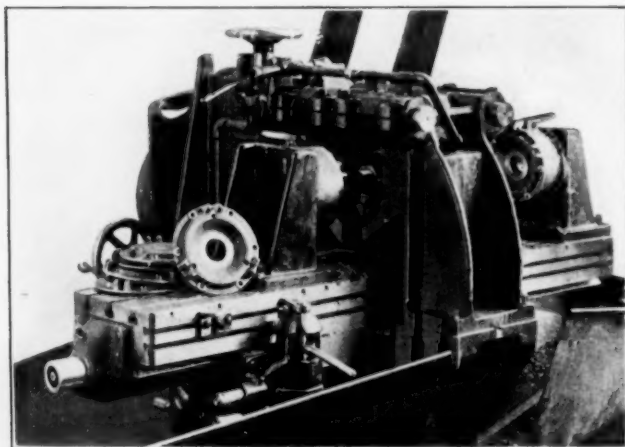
A DEPARTURE FROM THE STEREOTYPED METHODS OF MILLING
